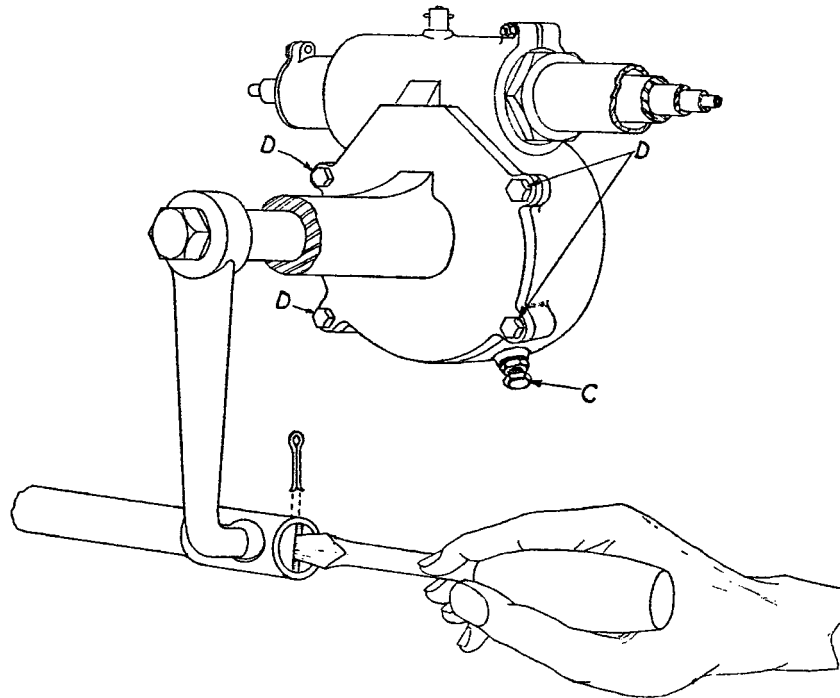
Taking Lost Motion from Steering Connecting Rod (Fore and Aft Type)
